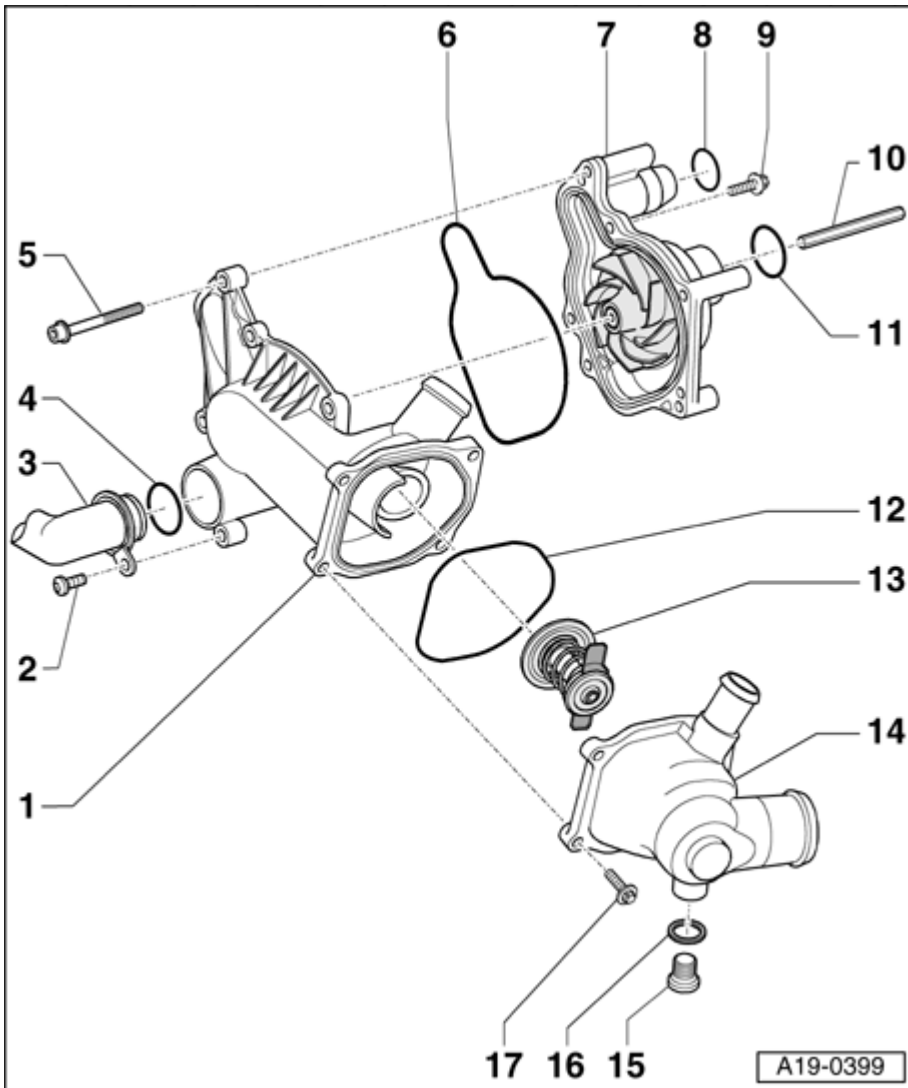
Coolant Pump And Coolant Regulator, Component Overview
